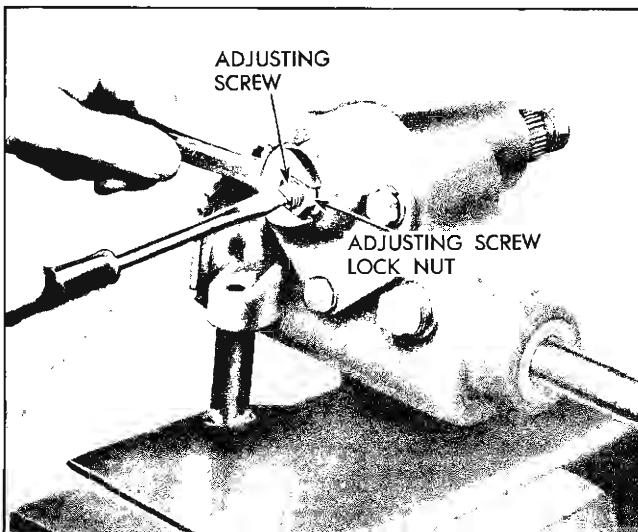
Adjusting Pitman and Ball Nut Backlash
